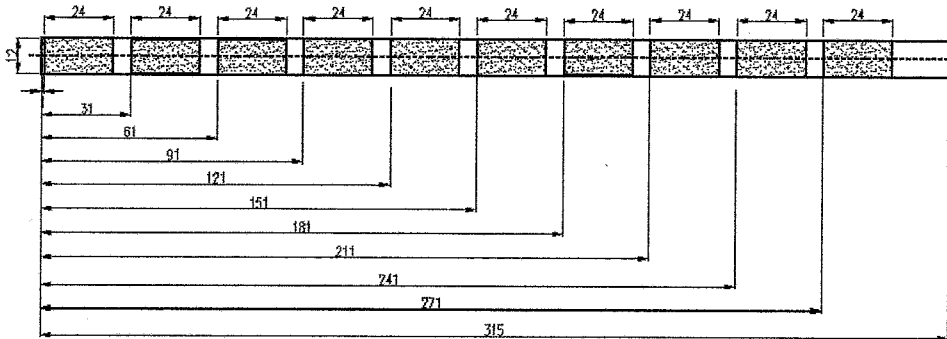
Layout of the clamped-free aluminium beam. Dimensions in mm.
